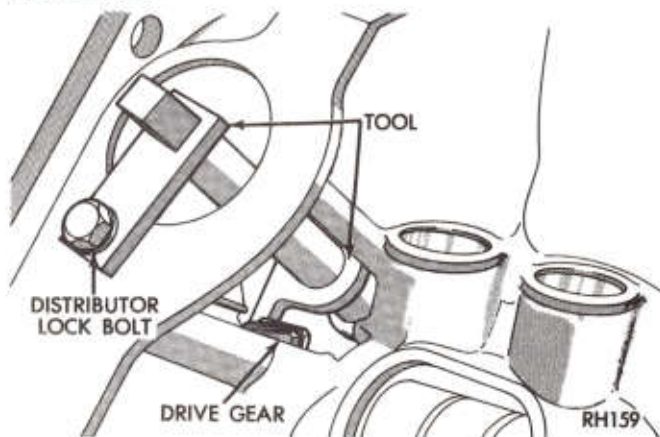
Camshaft Holding Tool C-3509 in Installed Position
